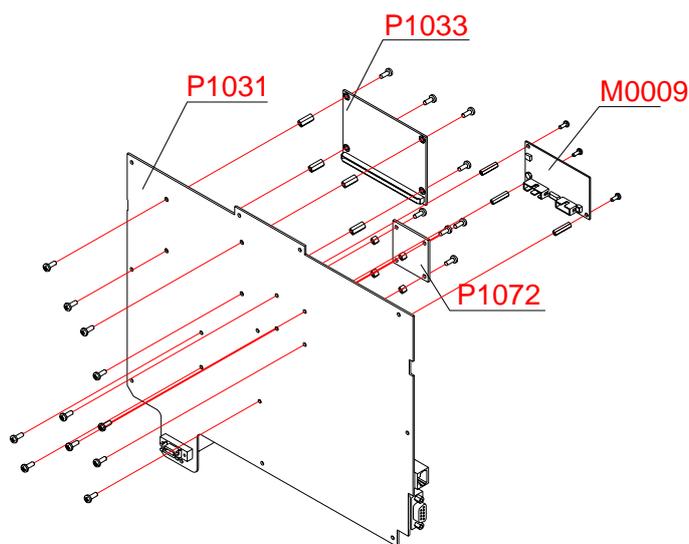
Front case disassembly – CPU module, SpO₂ module and IBP board
